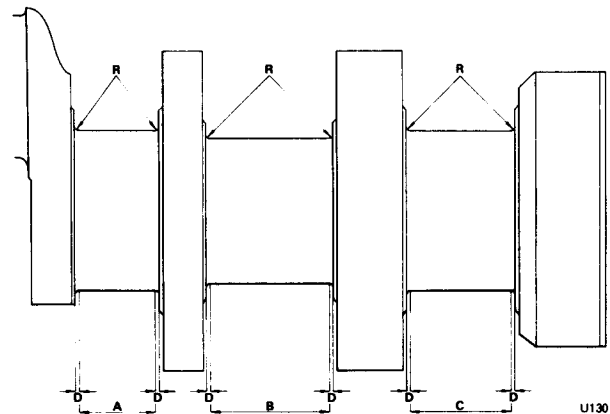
CRANKPIN AND JOURNAL GRINDING DIMENSIONS
